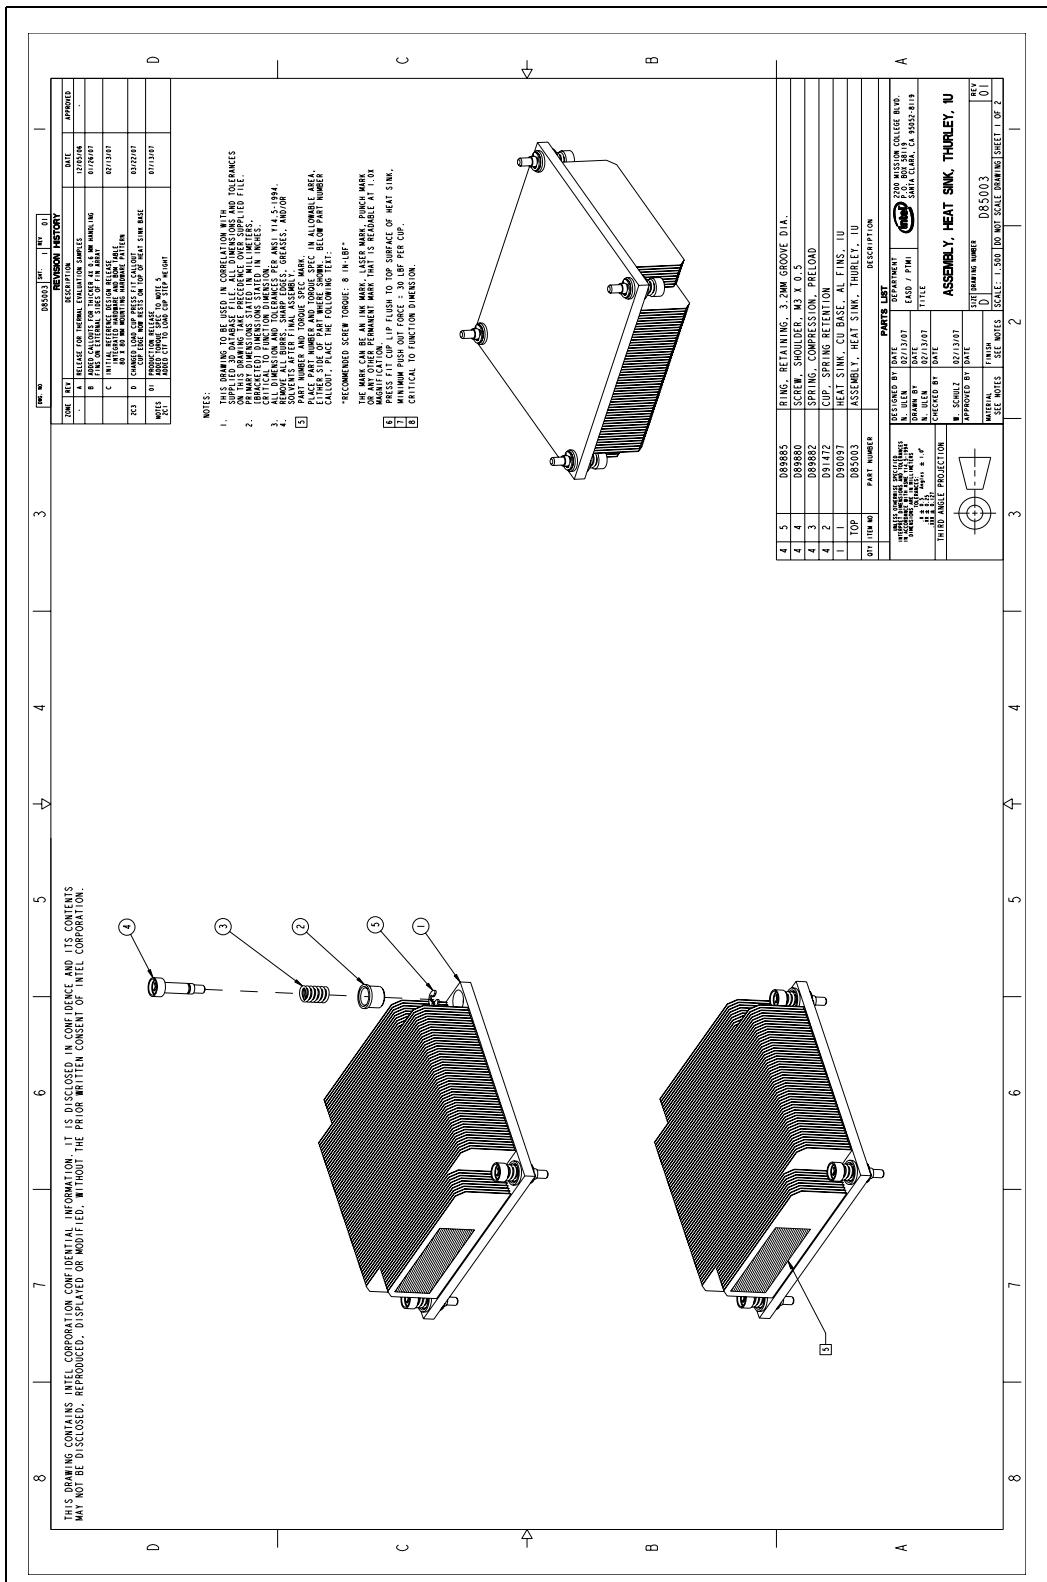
1U Reference Heatsink Assembly (Sheet 2 of 2)
